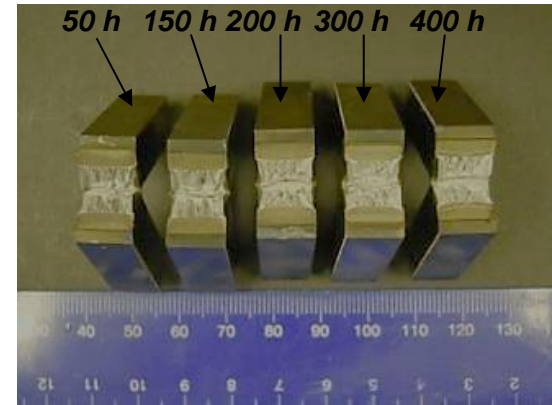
Fracture surface of pre-cracked Charpy exposed in SO₂ environment and tested at -20°C
